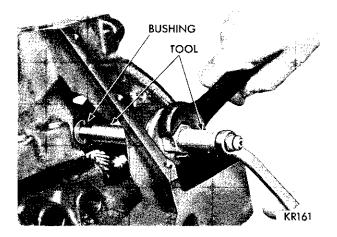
Burnishing Distributor Drive Shaft Bushing
